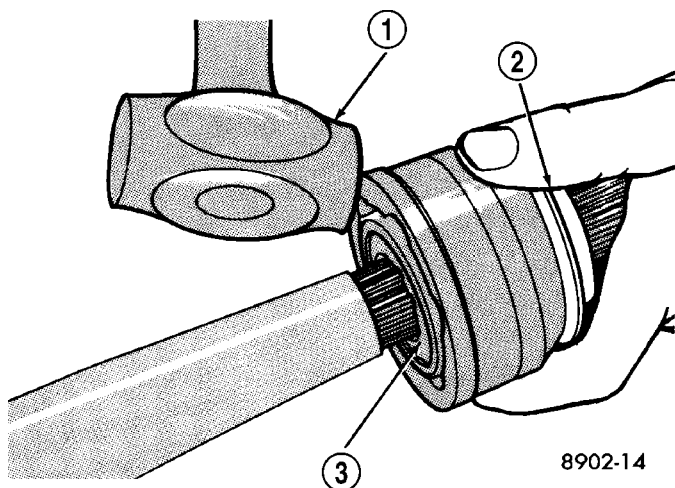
Outer C/V Joint Removal from Interconnecting Shaft
